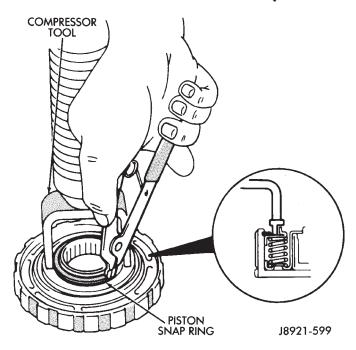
Removing/Installing Second Brake Piston Snap Ring
